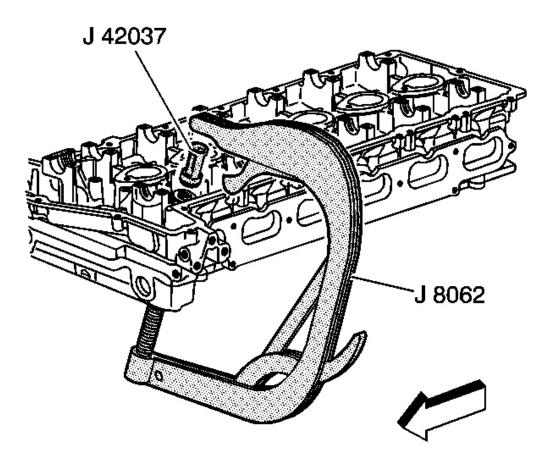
Compressing Valve Springs Using J 8062 & J 42037 Courtesy of GENERAL MOTORS CORP.
